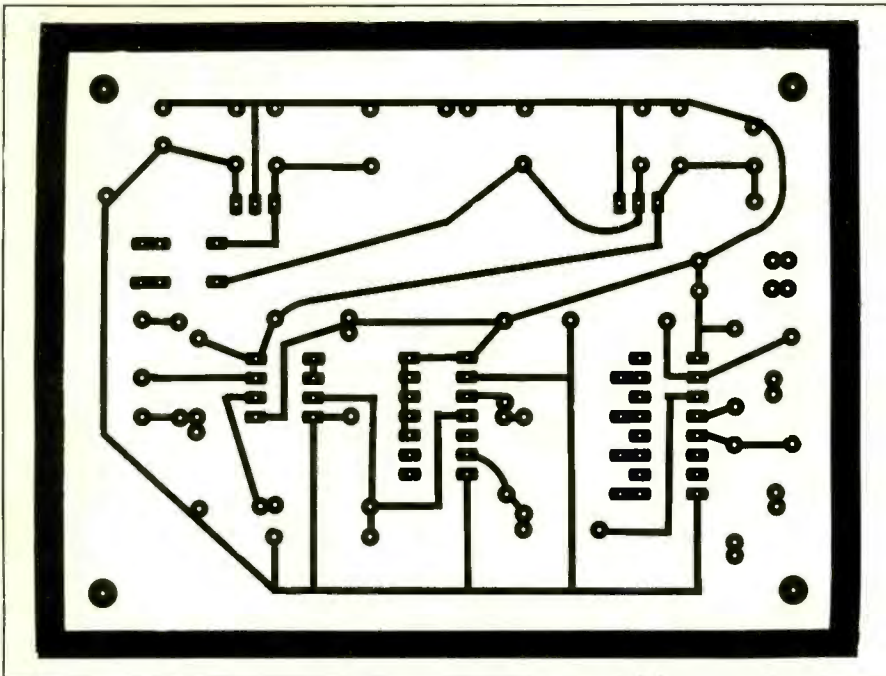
Actual-size etching-and-drilling guide to use for fabricating printed-circuit board.
